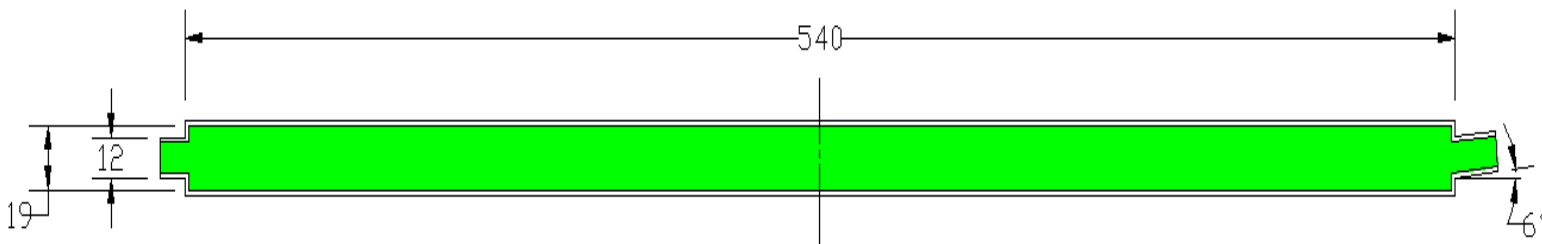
Heat recovery oil pan (all dimensions are in mm)
